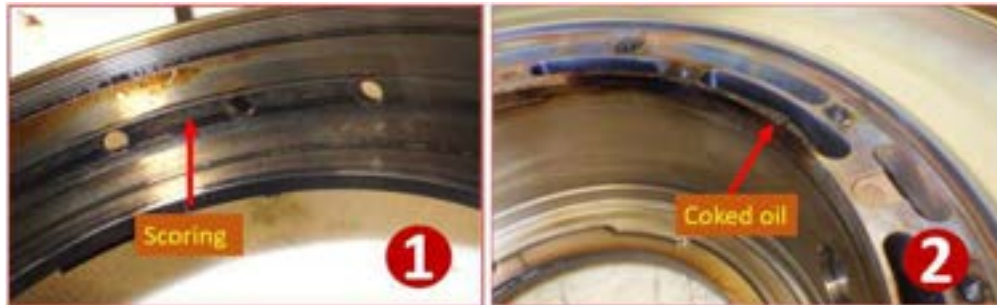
No. 3 bearing carbon seal and the No.5 bearing flex
